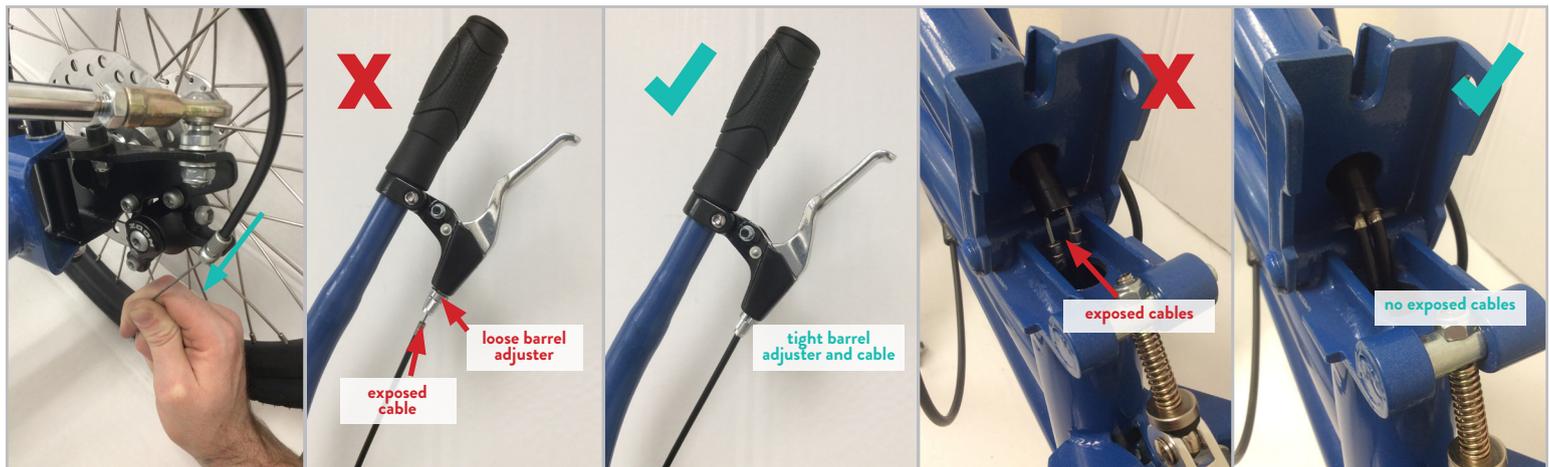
Pull each of the brake cables down at the right and left brake calipers to make sure there is no exposed cable visible at the brake lever or at the cable doubler by inserting the cable housing ferrules into the barrel adjusters and doubler.
